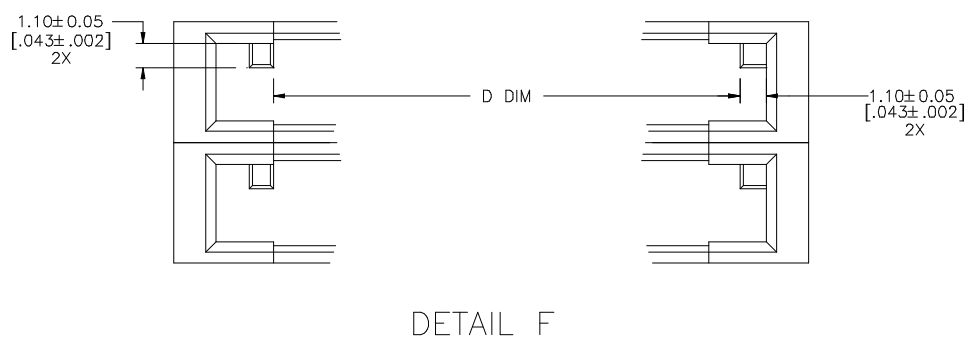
Board Layout (Single Card, Top View) With Optional Latching
